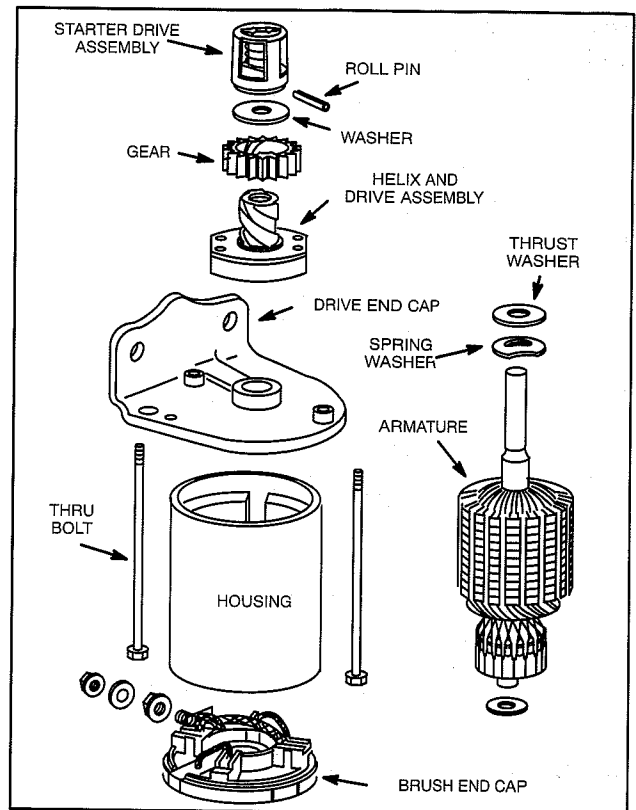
Exploded View - Starter Motor With Nylon Pinion
